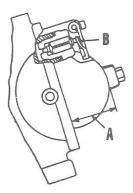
Tilt carburetor when measuring float height (A) so spring in inlet valve is not compressed. Float height should be 18-22 mm (0.709-0.866 in.). Bend float tang (B) for adjustment.
